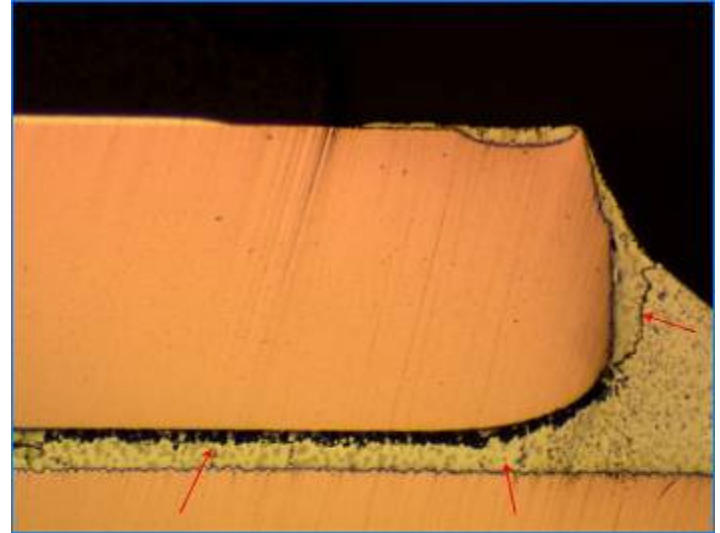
cross section, SN68, U28, right lead solder crack, 200xb
